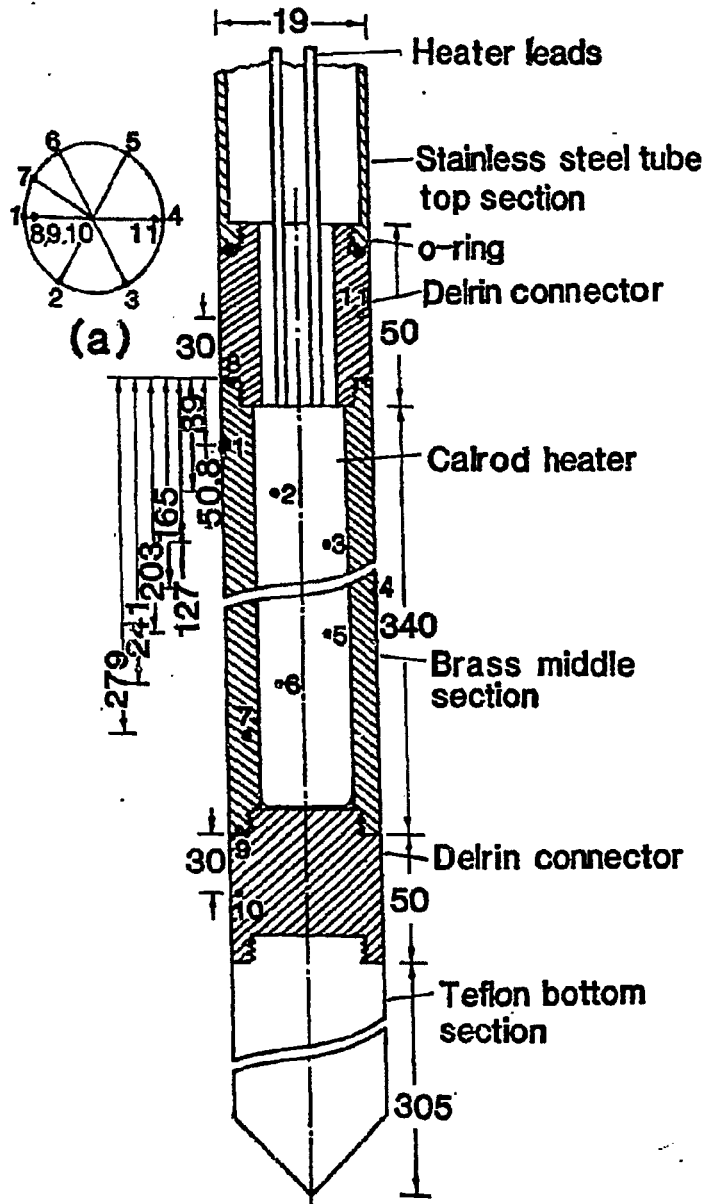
Design and dimensions of the 19.0 mm heat transfer probe assembly. dimensions are in mm. (a) Orientation of thermocouple.
